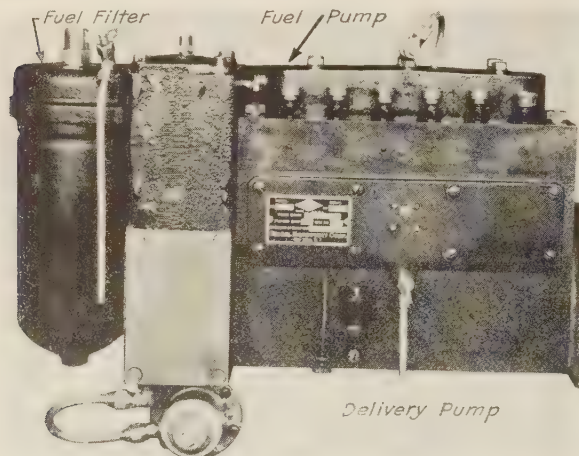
DECO PUMP ASSEMBLY USED ON THE A-C OIL ENGINE
